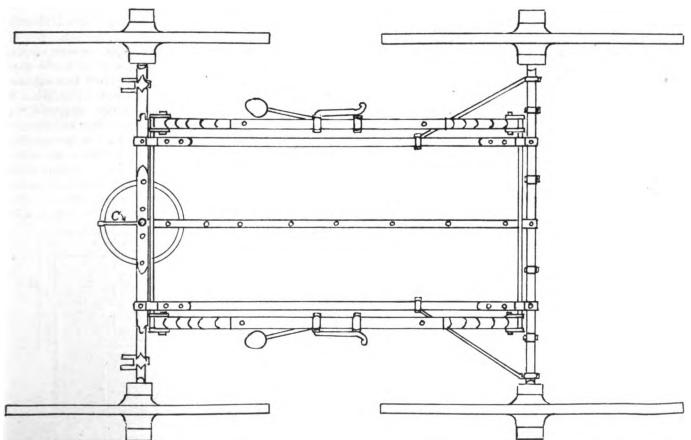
SHOWING THE PLAN OF THE RUNNING GEAR OF THIS LIGHT VEHICLE
